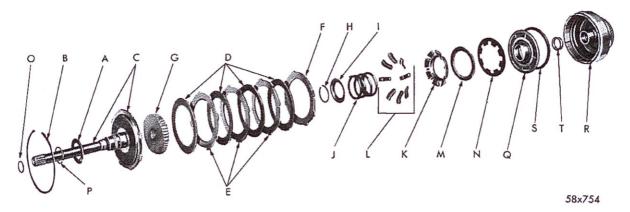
TorqueFlite Front Clutch (Exploded View)
